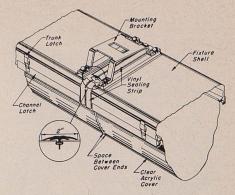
Joint between fixtures illustrating how mounting brackets support and align the two ends of adjacent fixture housings so that the extruded vinyl sealing strip can effectively seal the joint.
